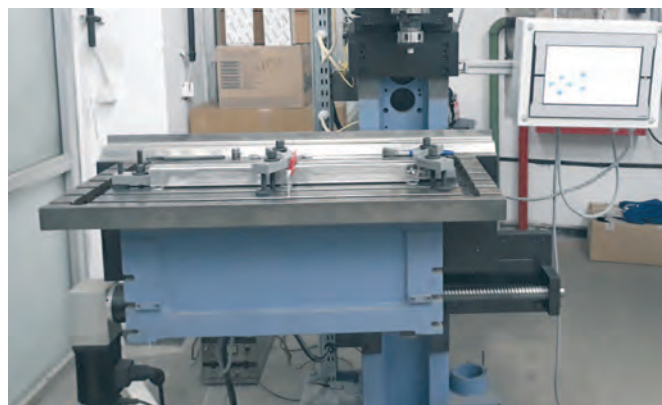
Positioning of the test piece for both FSW and FSP on the table of the MMPF machine.
